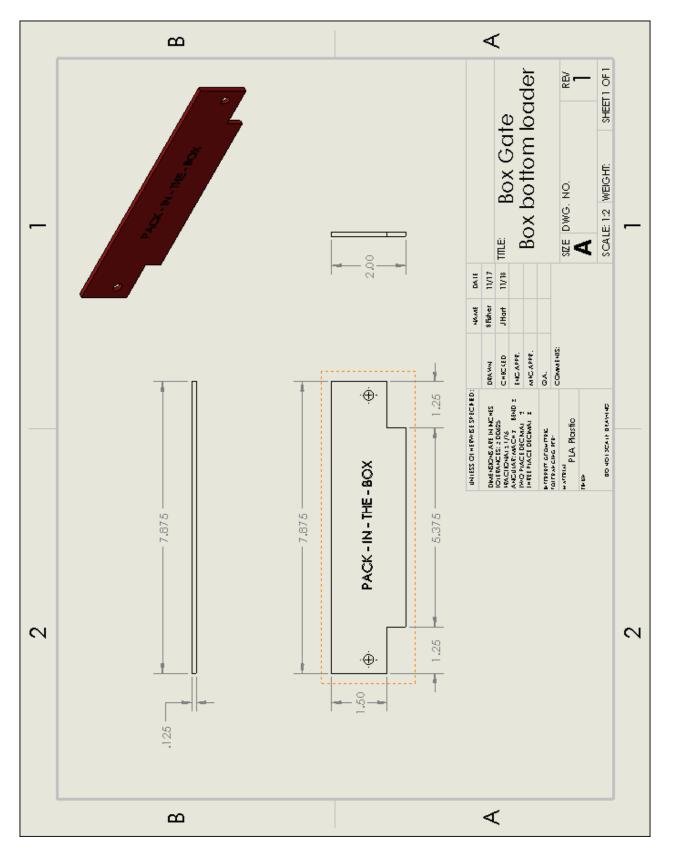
Box Bottom Dispenser Adjustable Gate Drawing (not to scale)
